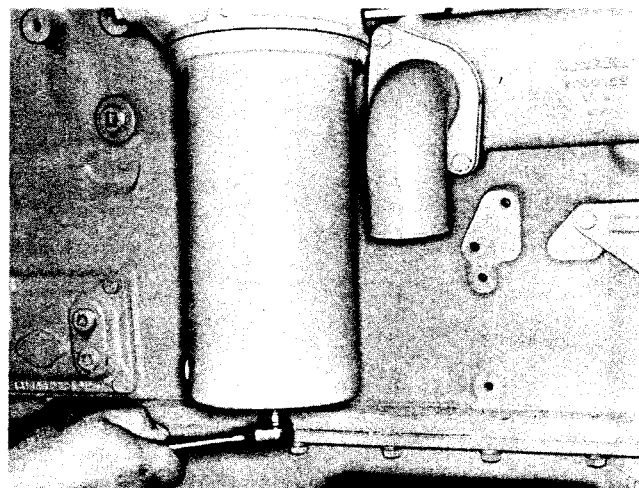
(N10098) Removing lubricating oil filter, 927 C.I.D. Series
